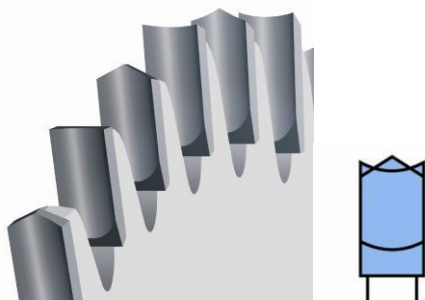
Top tooth/hollow tooth (source: Leitz GmbH & Co. KG)
